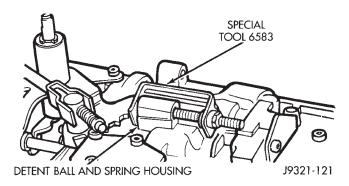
Securing Detent Ball And Spring With Retainer Tool
